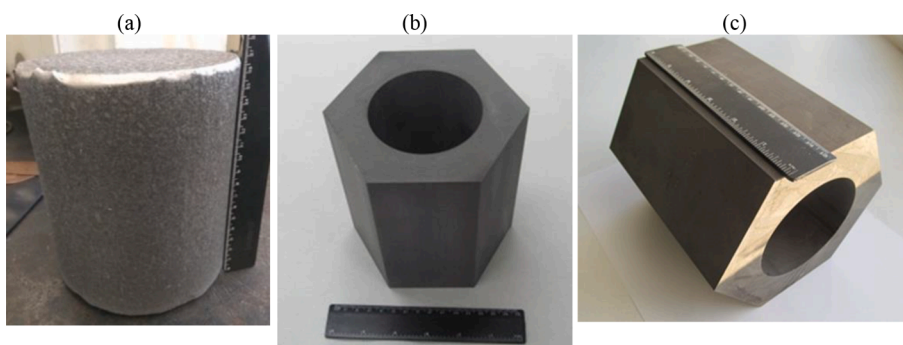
Manufacture of blocks from titanium beryllide TiBe₁₂: (a) billet after vacuum hot pressing; (b,c) final hexagonal block with center hole after machining.
